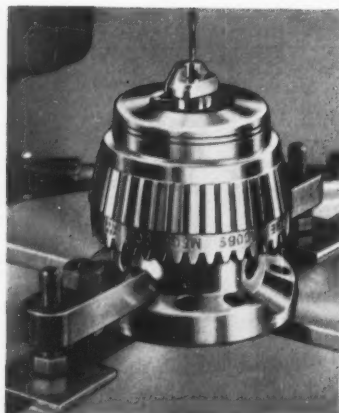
Jacobs Rubber-Flex collet chuck with flange mount
